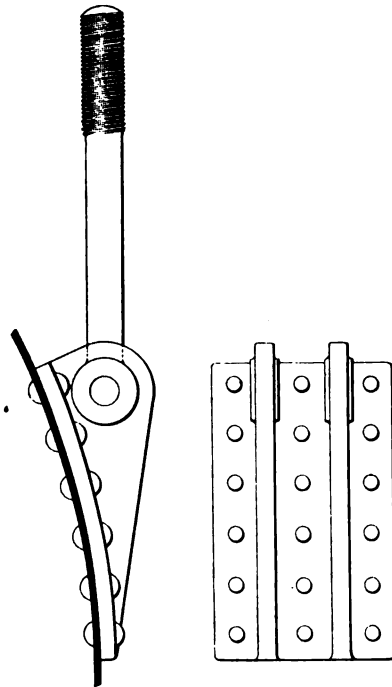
BOILER SUPPORT, SHOWING GOOD DESIGN OF LUG
